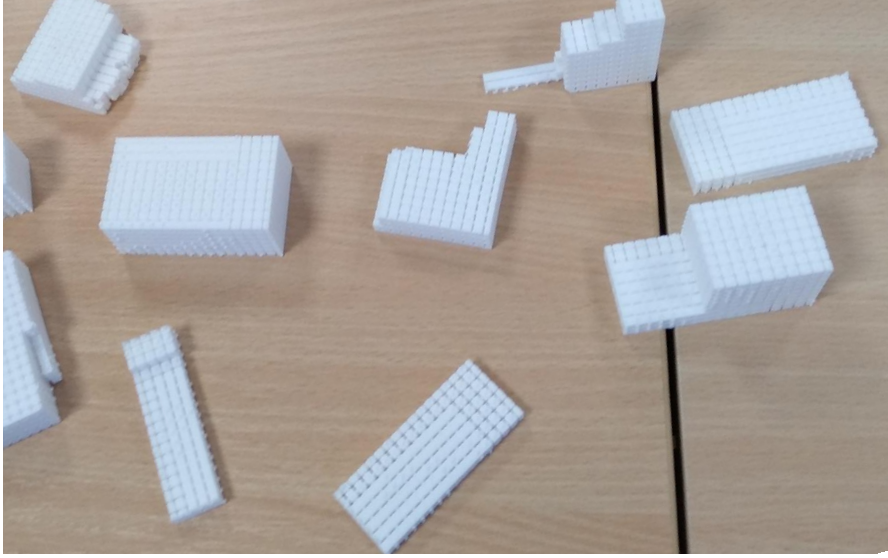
Broken pieces of the proposed 3D-printed DRA.
